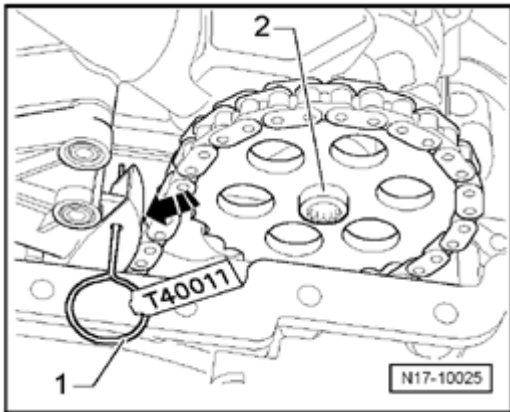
Compressing Chain Tensioner And Securing It With Locking Pin T40011
